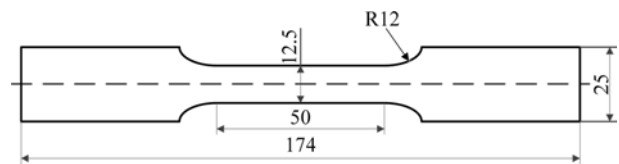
Specimen shape for uniaxial tensile test (Unit: mm)
